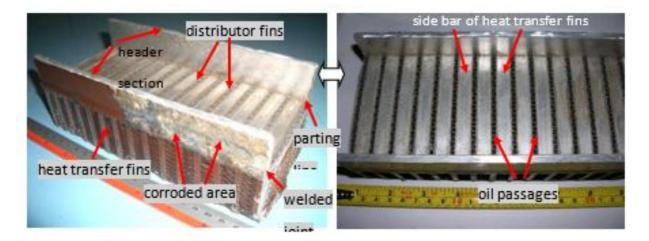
Close up view of the inside header port, showing a number of oil passages containing distributor fins and parting line of the weld joint between header and side bars/parting sheets
